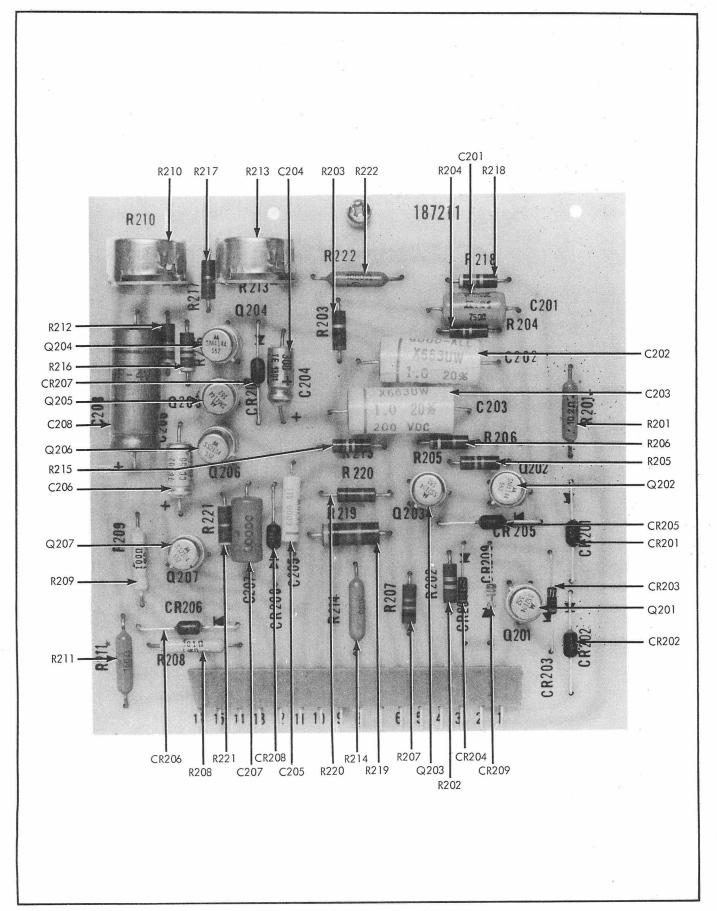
DRIVER AND TRIP ASSEMBLY
